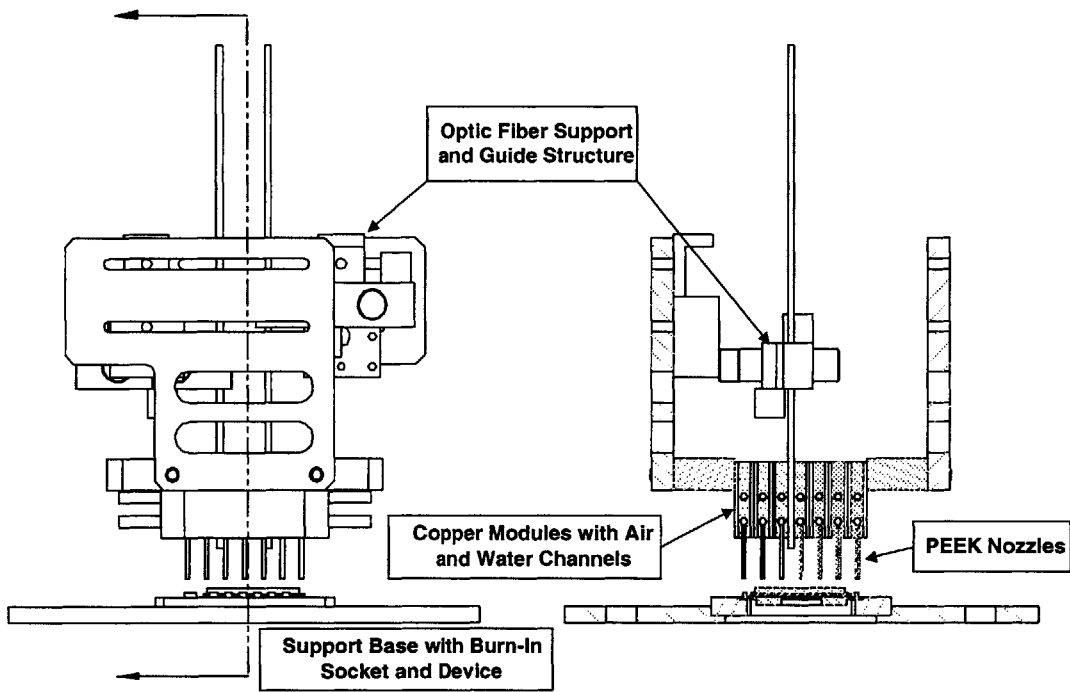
Side view and cross sectional view of assembled laser/convection system. Manifold system and base support structure not shown.
